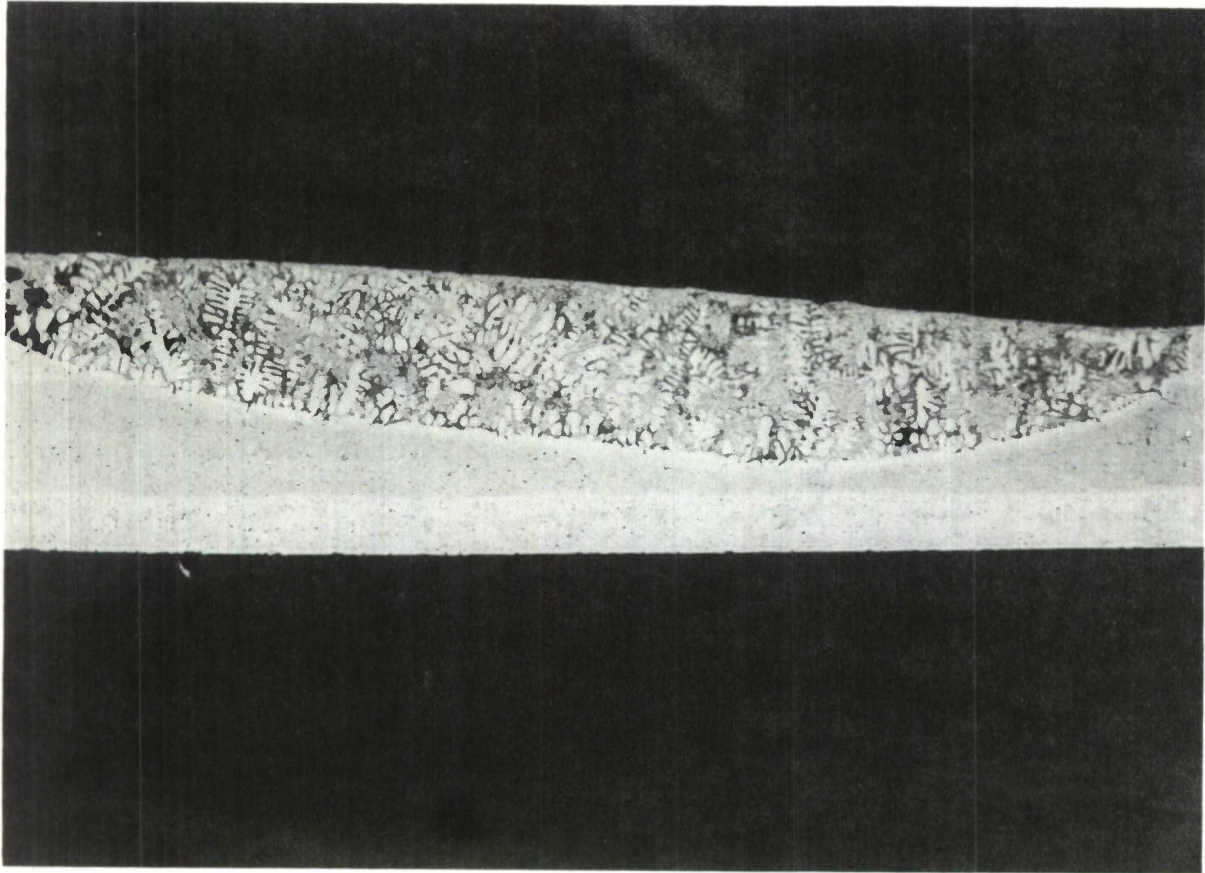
Y-99742 Macro of Pad Test on Al-Si-Ge Alloy No. 8 Vacuum Brazed 7 min at 1095°F
